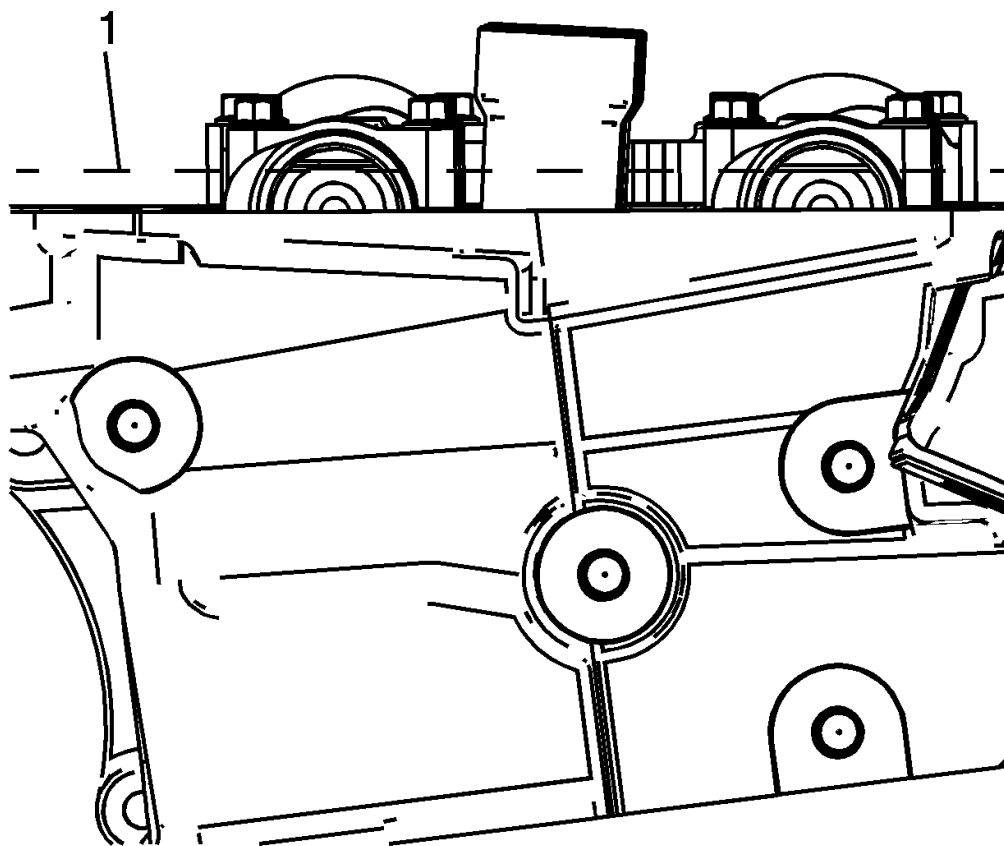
View Of Camshaft Flats Parallel With Camshaft Cover Rail
